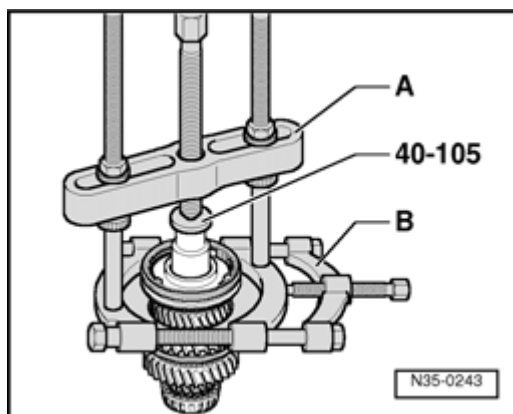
Pulling off 3rd and 4th gear synchro-hub/locking collar over 4th gear wheel
